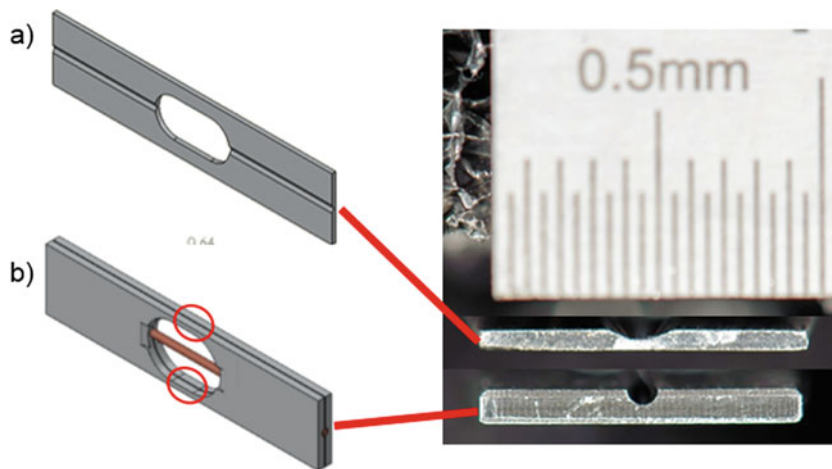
CAD images and cross-sectional photos of (a) tab holder 001 and (b) tab holder 002
